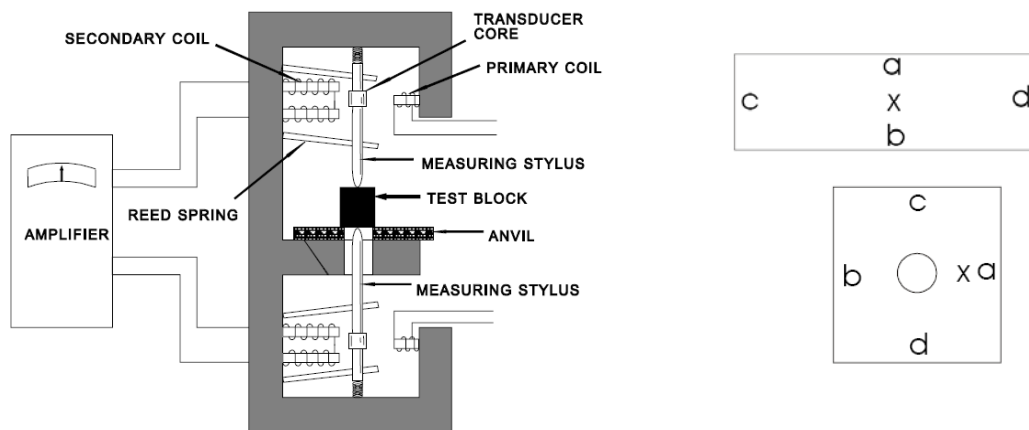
Mechanical gauge block comparator and location of gauging points on gauge blocks for both length (X) and parallelism (a,b,c,d) measurements [1].
